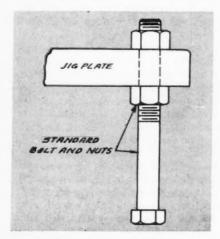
Economical leg support design suggested for a short-run production drill jig.
